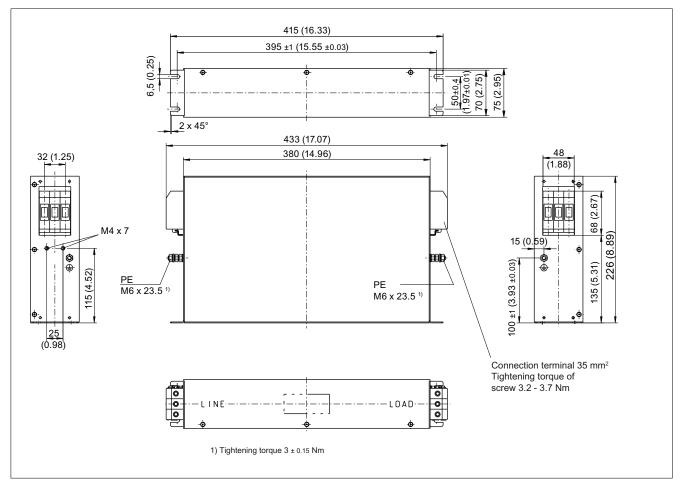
Dimension drawing of Basic Line Filter 36 kW, order number 6SL3000-0BE23-6DA1, all dimensions in mm and (inches)
